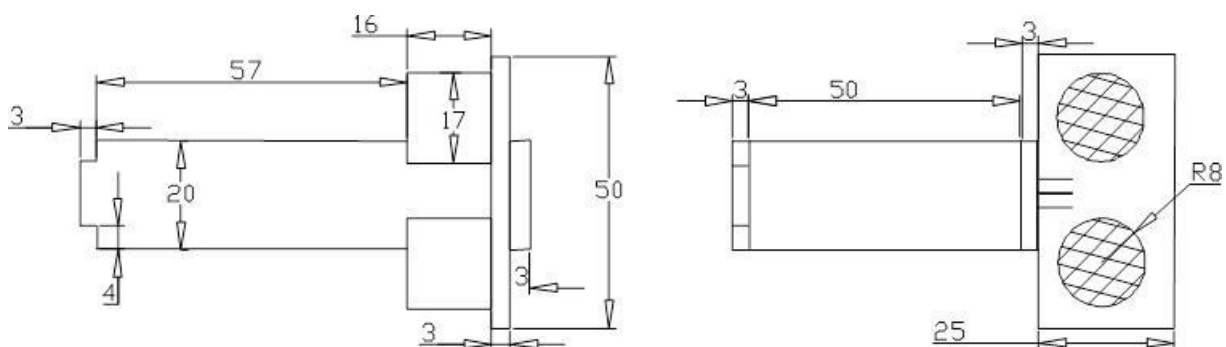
The aluminium bracket that mounts the servo motors.
